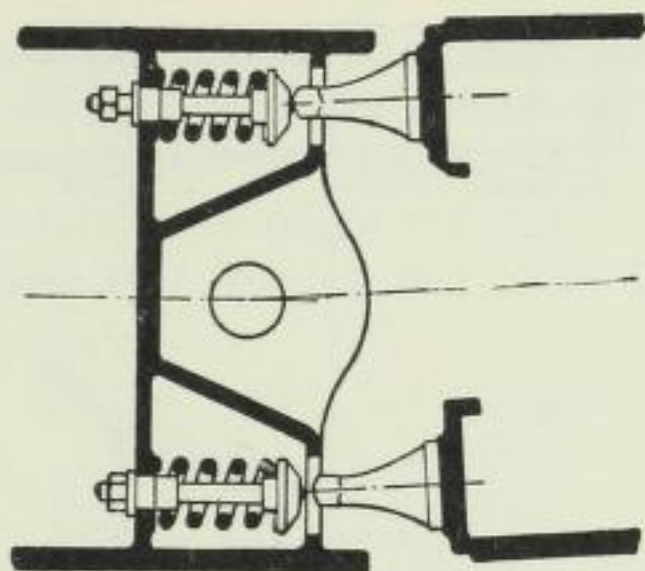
Spring Bearing Buffers at Frame Union (Delaware and Hudson Ry.).
